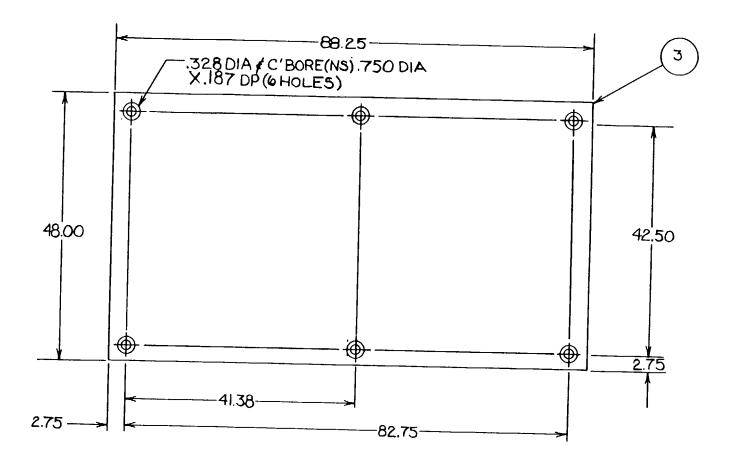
Production Control Board Part No. 20083287 (Sheet 1 of 2)
